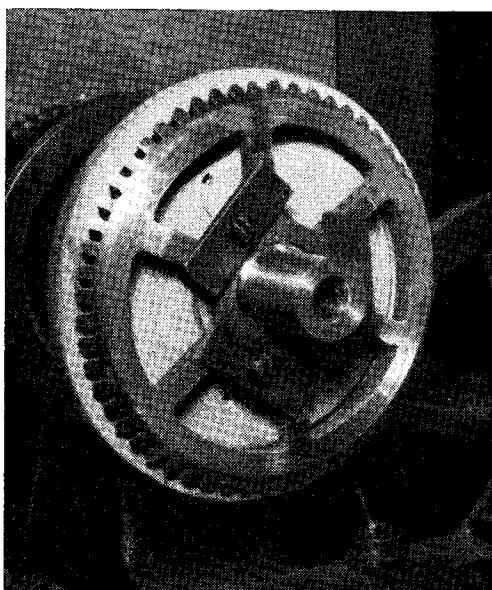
A 56-tooth G.M. mitre wheel, 4 in. dia.
